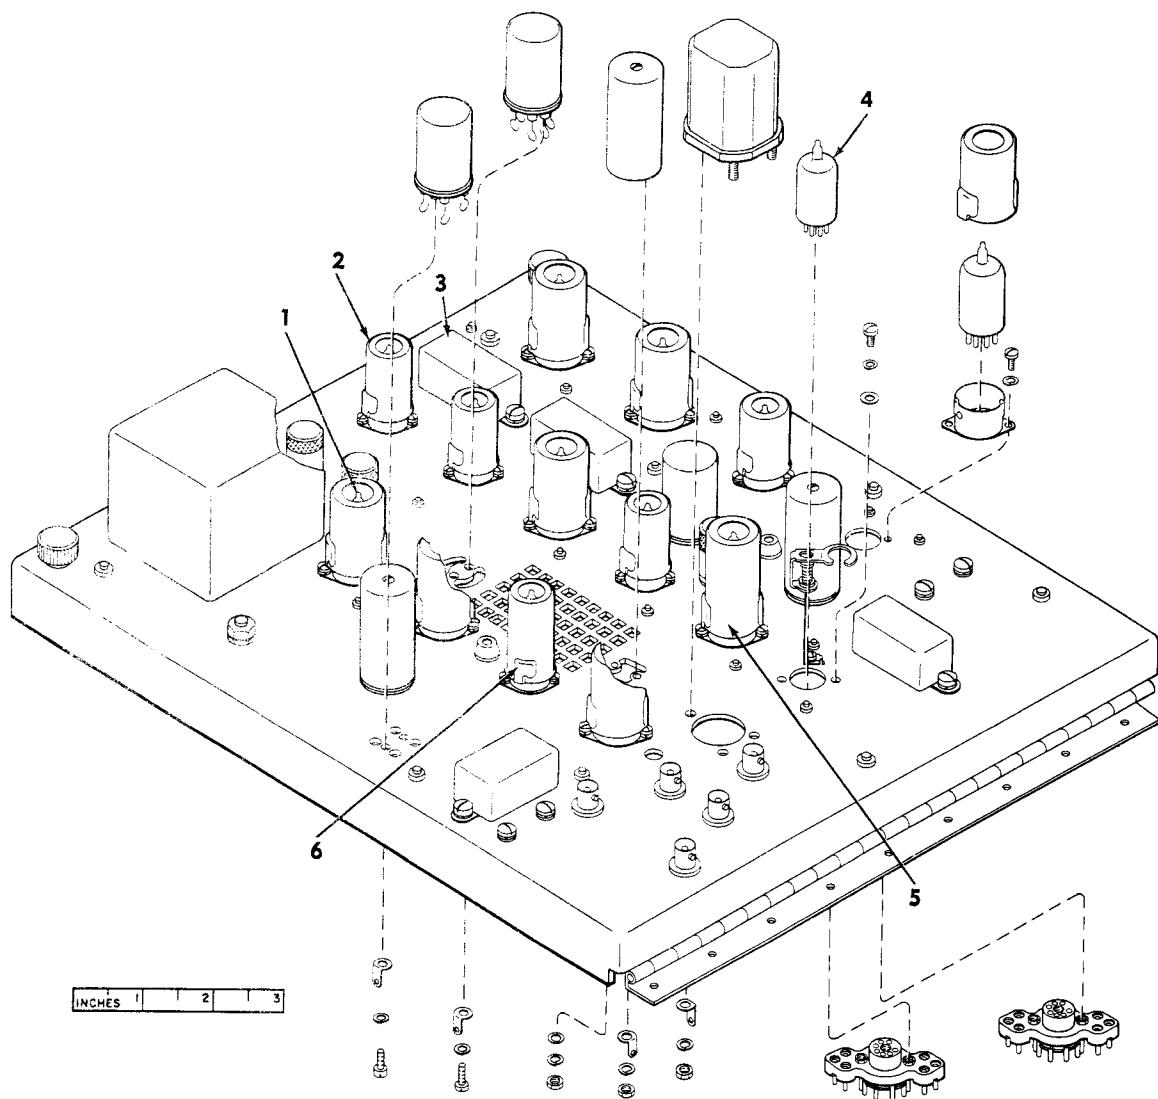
Oscillator subassembly (9141257) - partial exploded view
